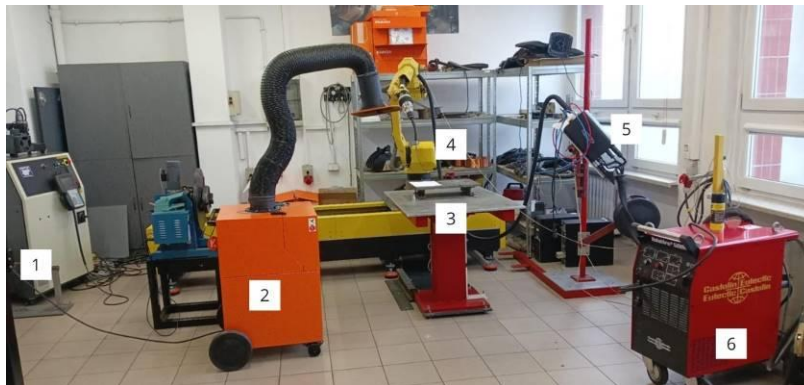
A view of the robotic welding cell with FANUC Arc Mate 100iC welding robot
